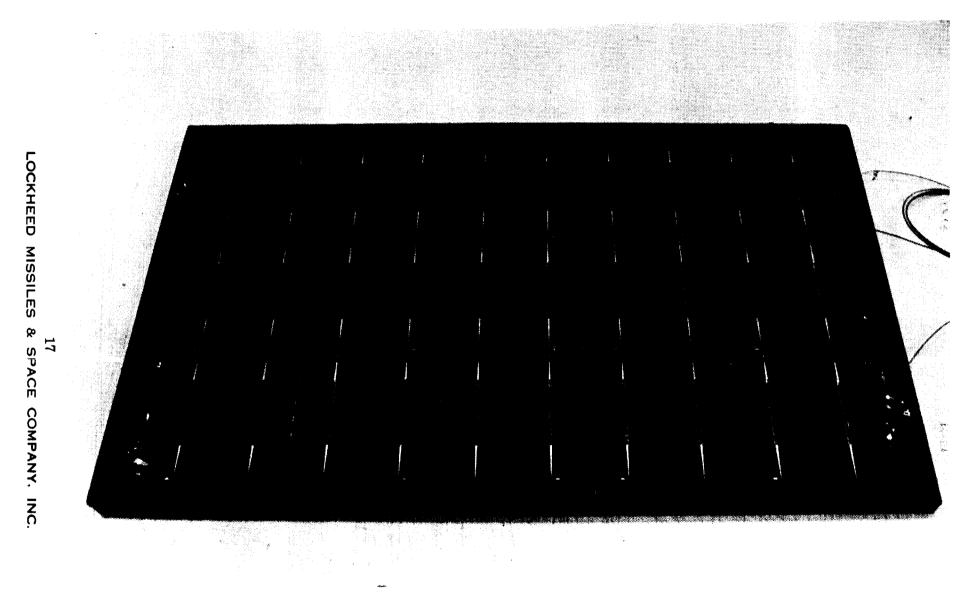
Module/Plate Assembly (8 x 8 cm Cells) x8517166-501
